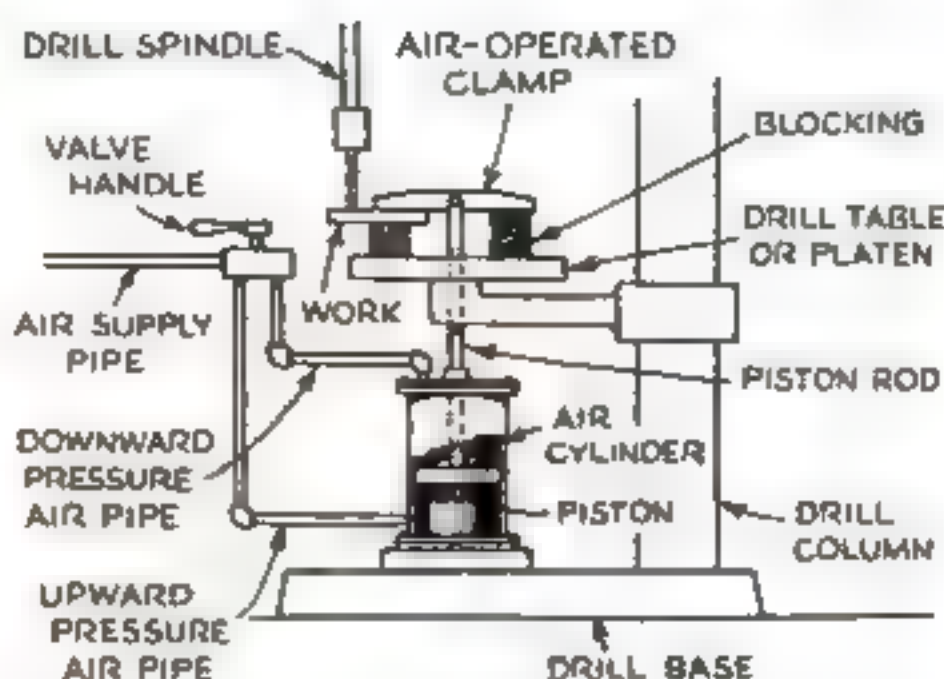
Diagram showing typical arrangement of parts for a pneumatic drill-press clamp
